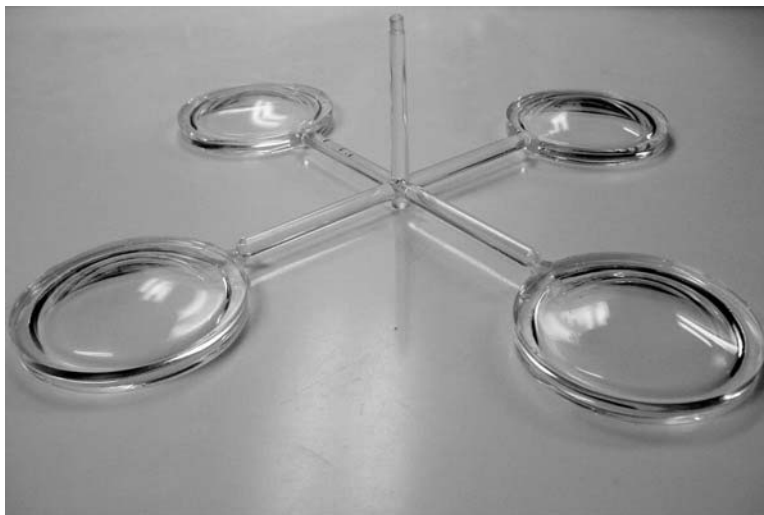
Photograph of optical lens parts molded by a four-cavity mold [10] (courtesy of 3M Precision Lens).
